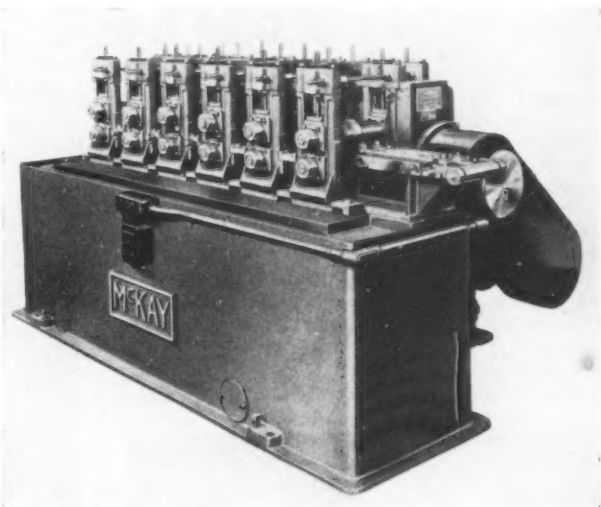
A McKay strip-forming machine from the range now being built in this country. These machines are suitable for forming flat strip into a wide variety of shapes
